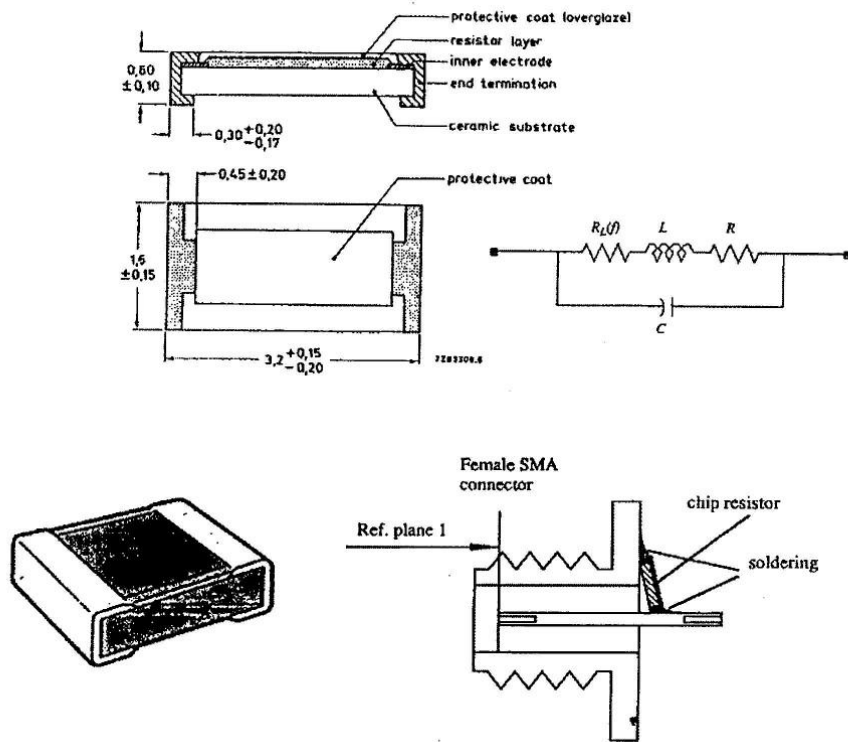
SMA connector with soldered $50\ \Omega$ chip resistor structure
